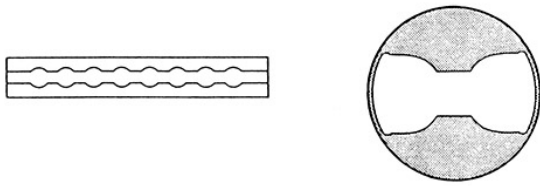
Example of tie-down attachment points on track and anchor plate
